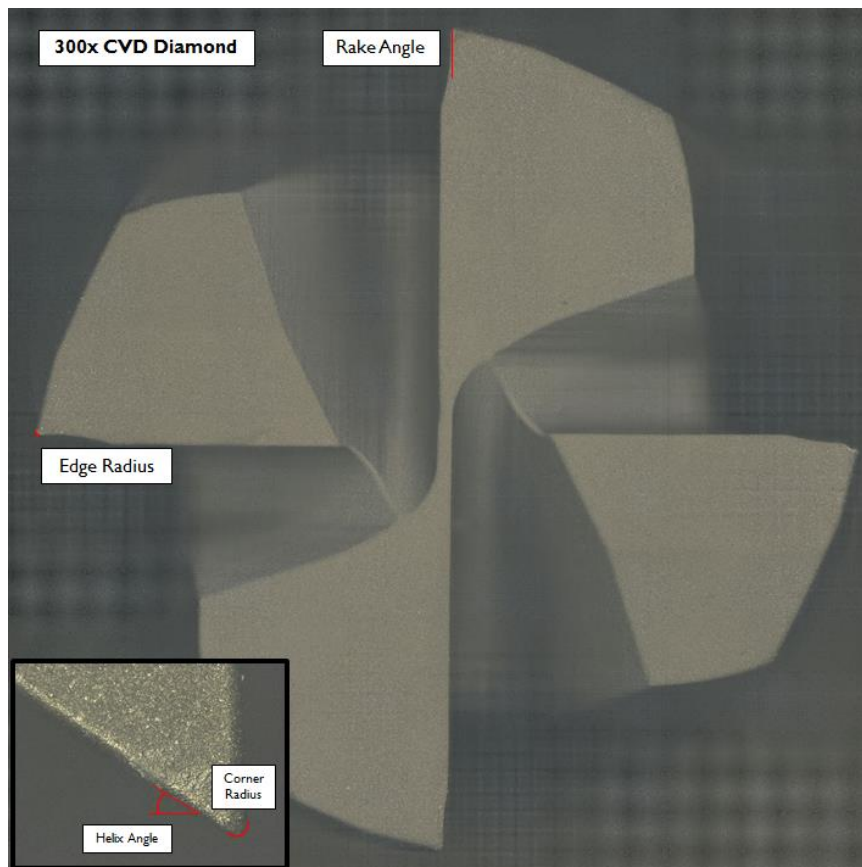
Crystallume CVD diamond coated end mill tool geometry schematic.
